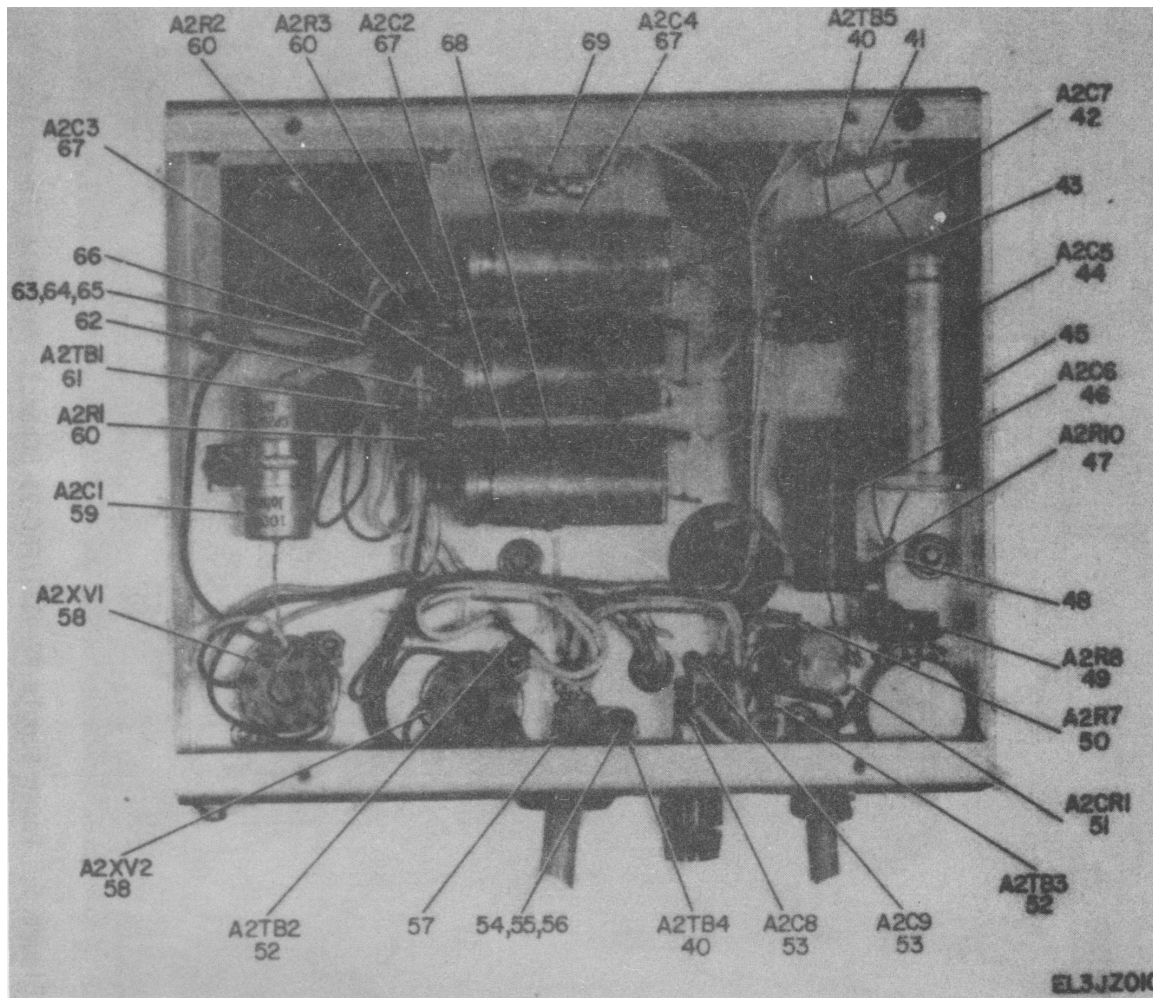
Power Supply PP-4151/FRC-93, Chassis Assembly (Sheet 1 of 2).
